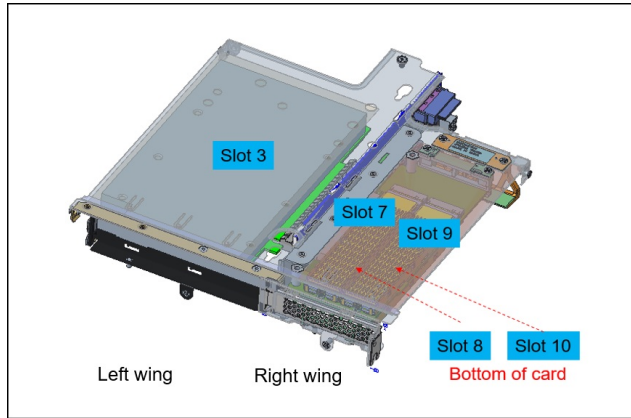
ThinkEdge SE360 V2 Riser Assembly (M.2 Riser + PCIe Riser) (feature BS5F)
